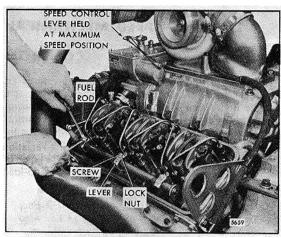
Position No. 1 Injector Rack Control Lever (One Screw and Lock Nut Assembly)
